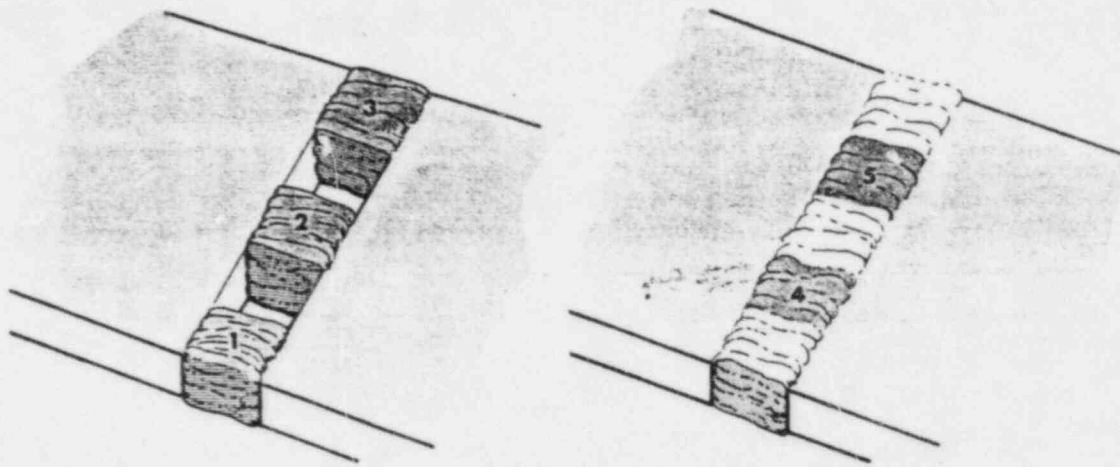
The intermittent weld, sometimes referred to as the skip weld, will prevent distortion.
